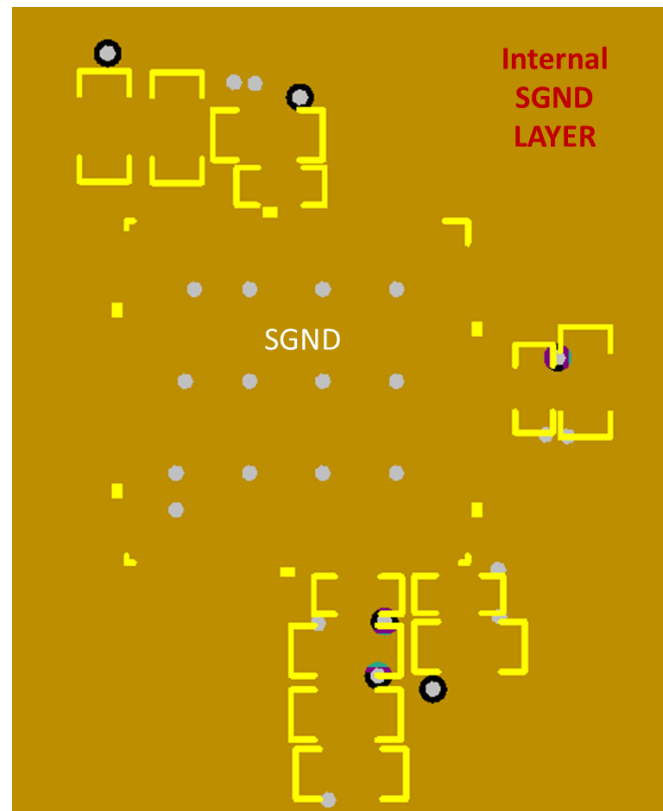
UCD3138A and UCD3138064A 64 Pin Layout Internal SGND Layer
